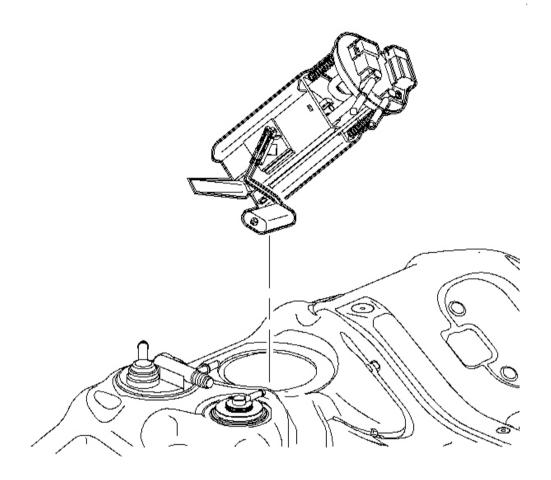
View Of Fuel Pump Modules Courtesy of GENERAL MOTORS CORP.
